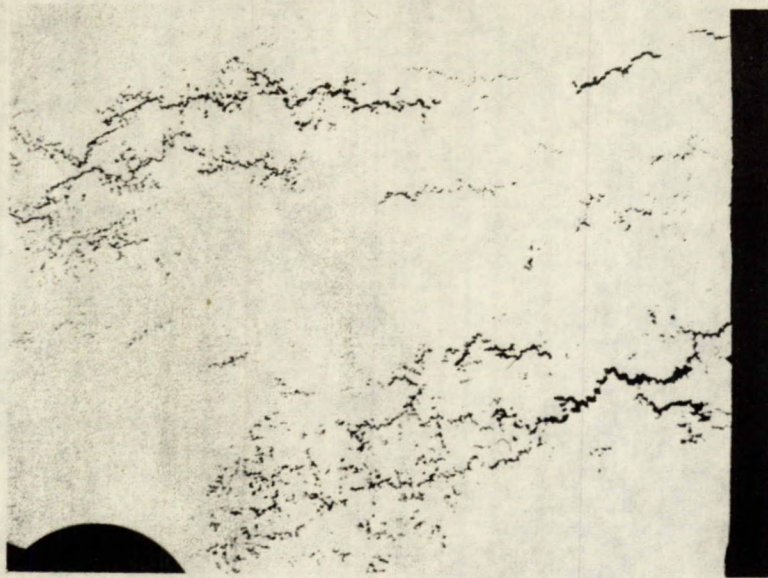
Plan view of impeller, showing location of the failures. The black semi-circles denote the plug-welded areas.
